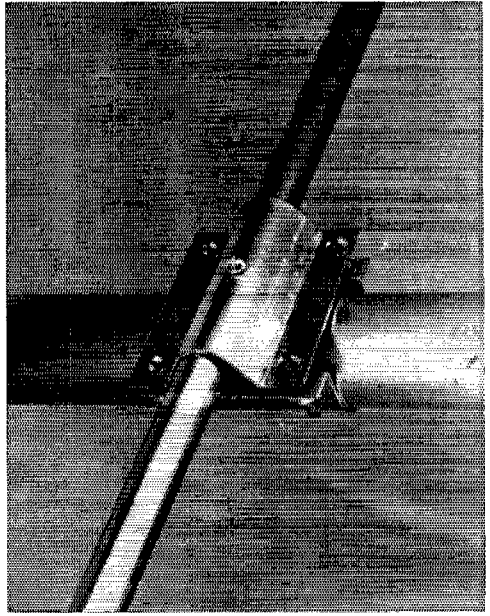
Model showing the method of mounting elements on the boom without drilling holes through the latter. For strongest permanent assembly, self-tapping screws should fasten the sheet-metal clamps in position.
